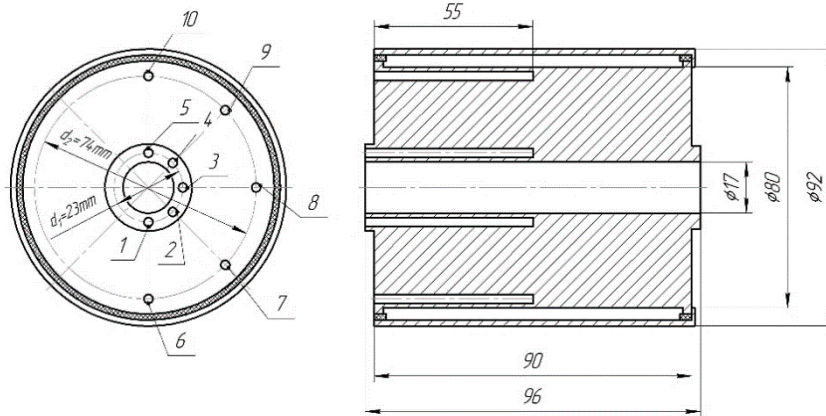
Drawing of the brass working section: 1...10 – channels for locating thermocouples
